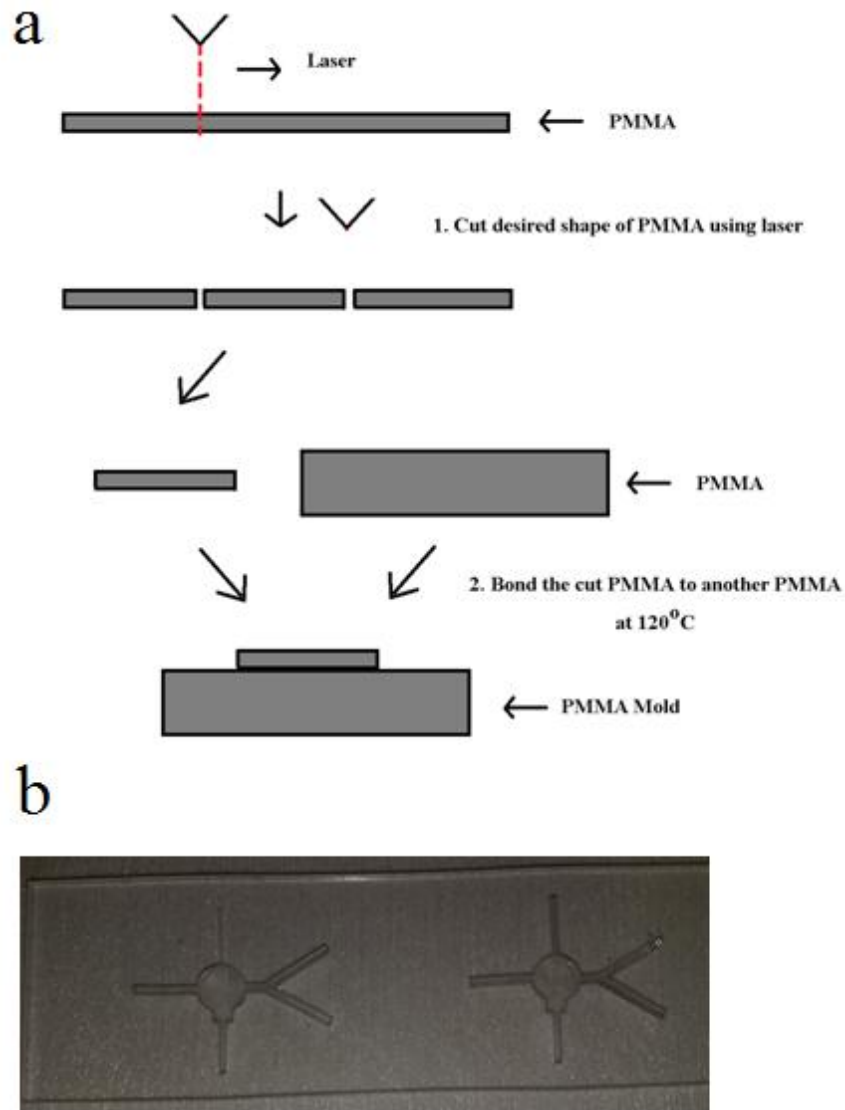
(a) Fabrication steps to create PMMA moulds and (b) Fabricated PMMA mould.
